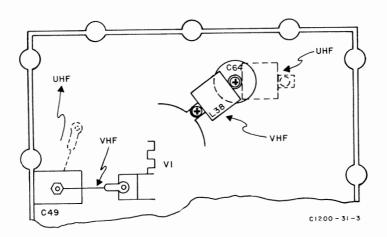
VHF Transmitter, Mounting of Inductor L38.
